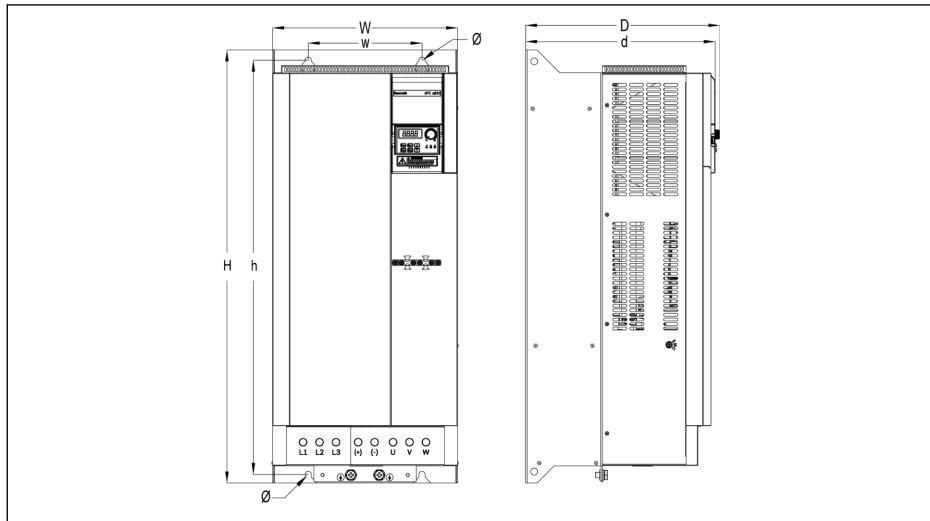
EFC 5610 75K0...90K0 dimensions figure (3P 380 VAC)
